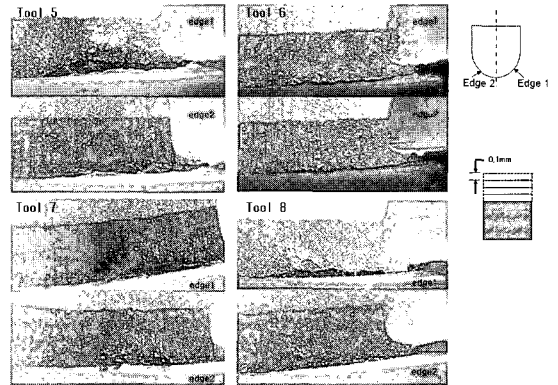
Photographs showing both edges of $\Phi 2\text{mm}$ ball endmill after cutting 4 layers
